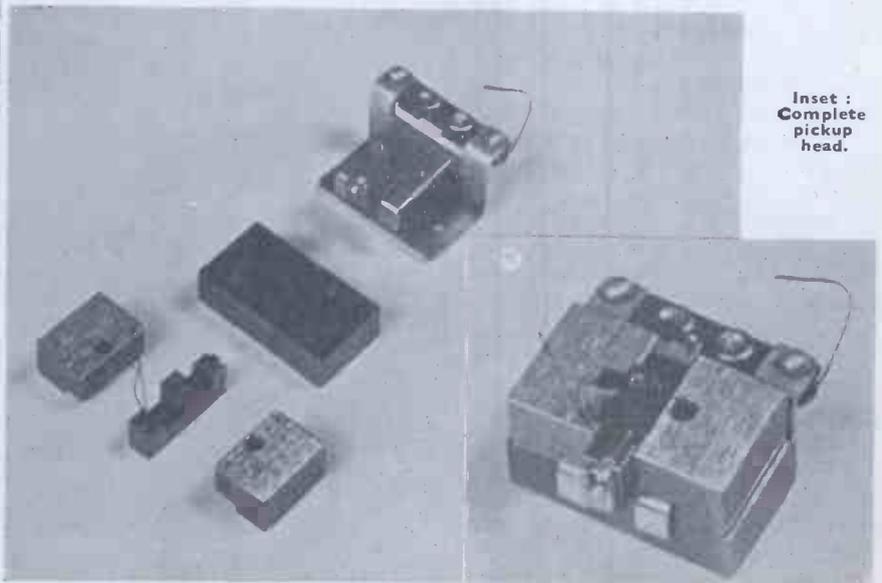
(below). Assembly of coil unit in pickup head, showing magnet and pole pieces.
